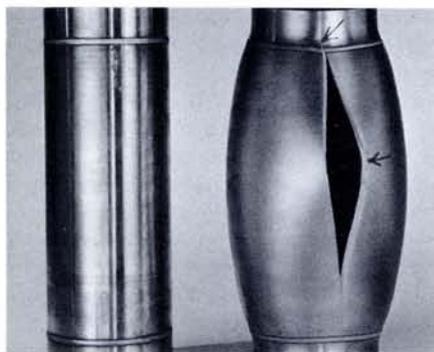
Pressure vessel test on CL5 laser-weld in 9mm stainless steel. The crack initiates at a stress raiser and runs cleanly across the weld.
